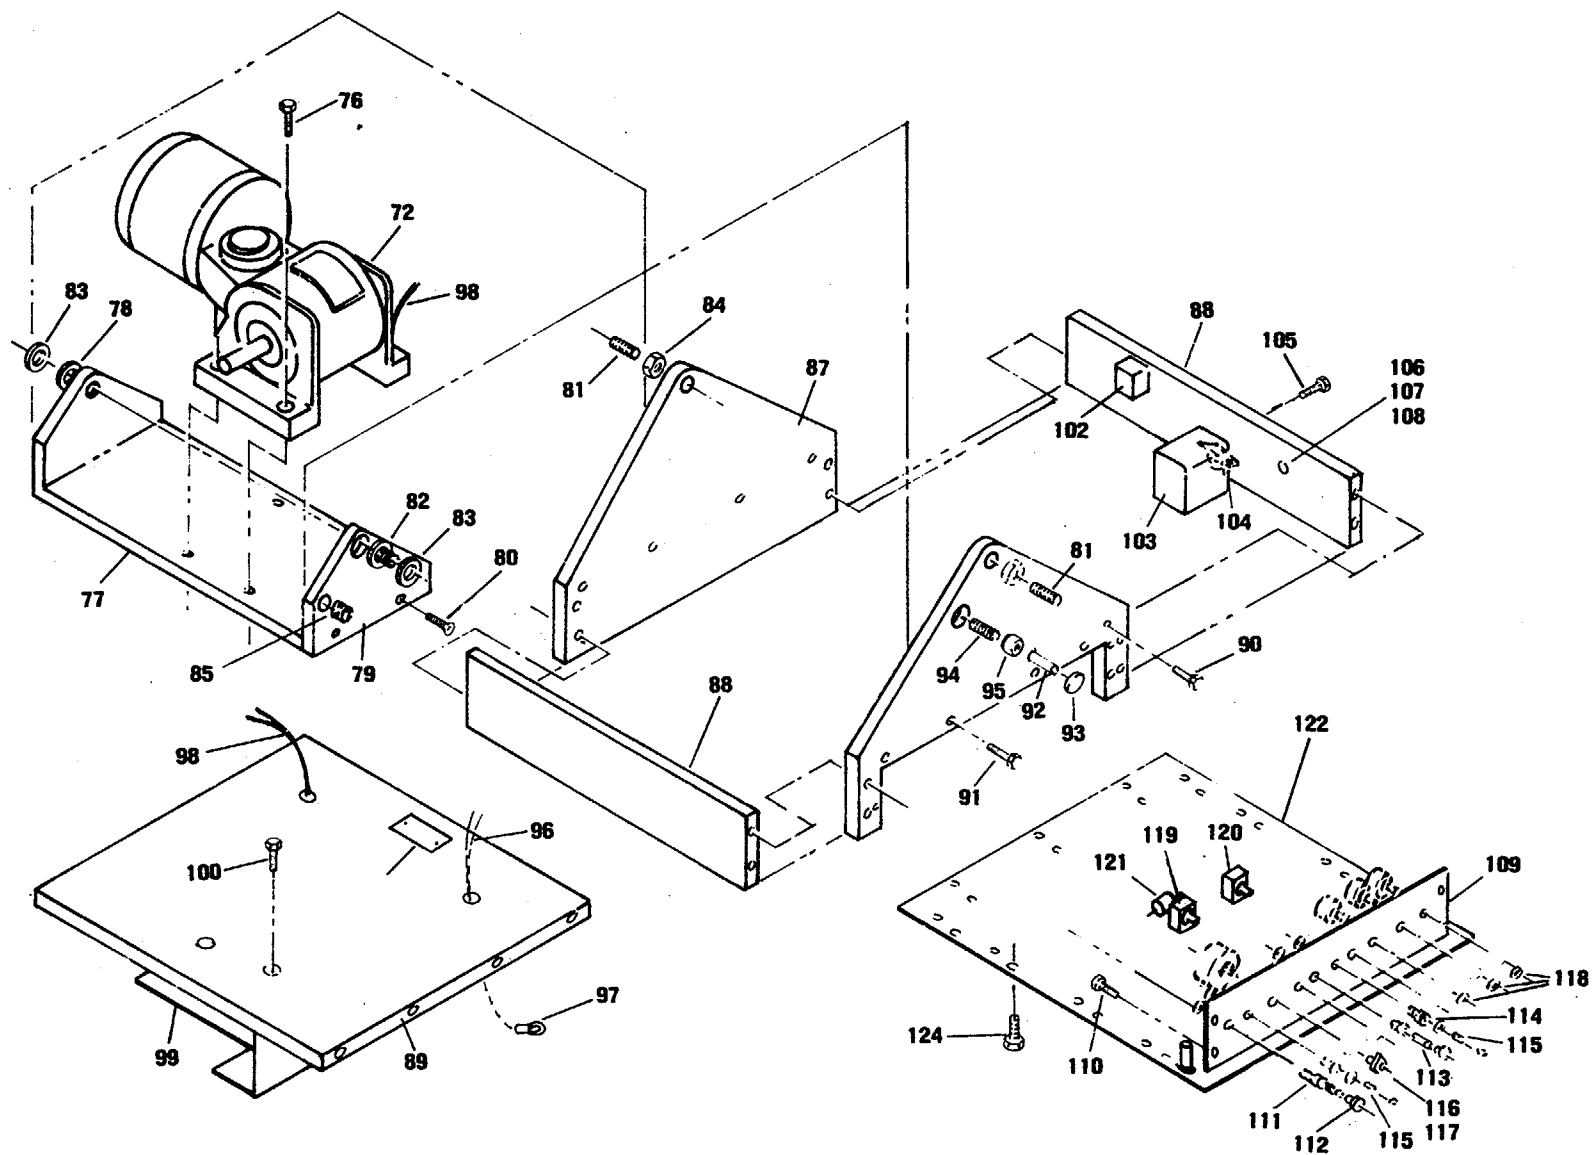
Gyro Tester Assembly (Sheet 3 of 3)
